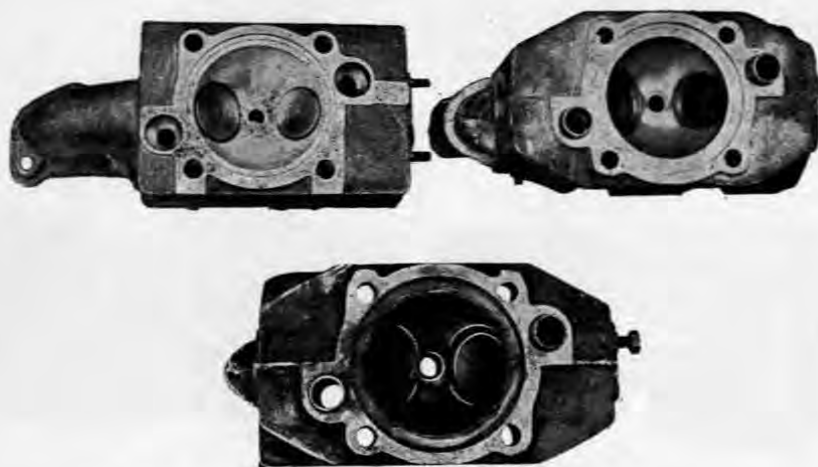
Development of the Tatra 111 cylinder head (bottom view).
